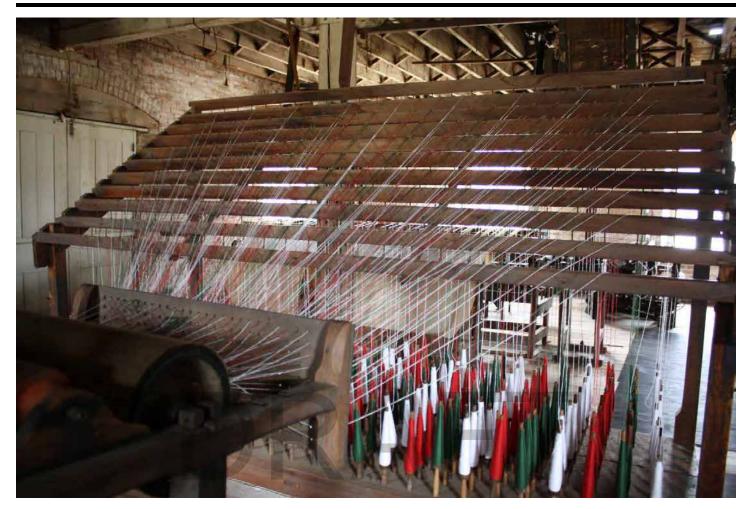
MO_Clay County_Watkins Mill_0022 Watkins Mill, second floor, warping mill creel stand, weaving room, camera facing northwest
